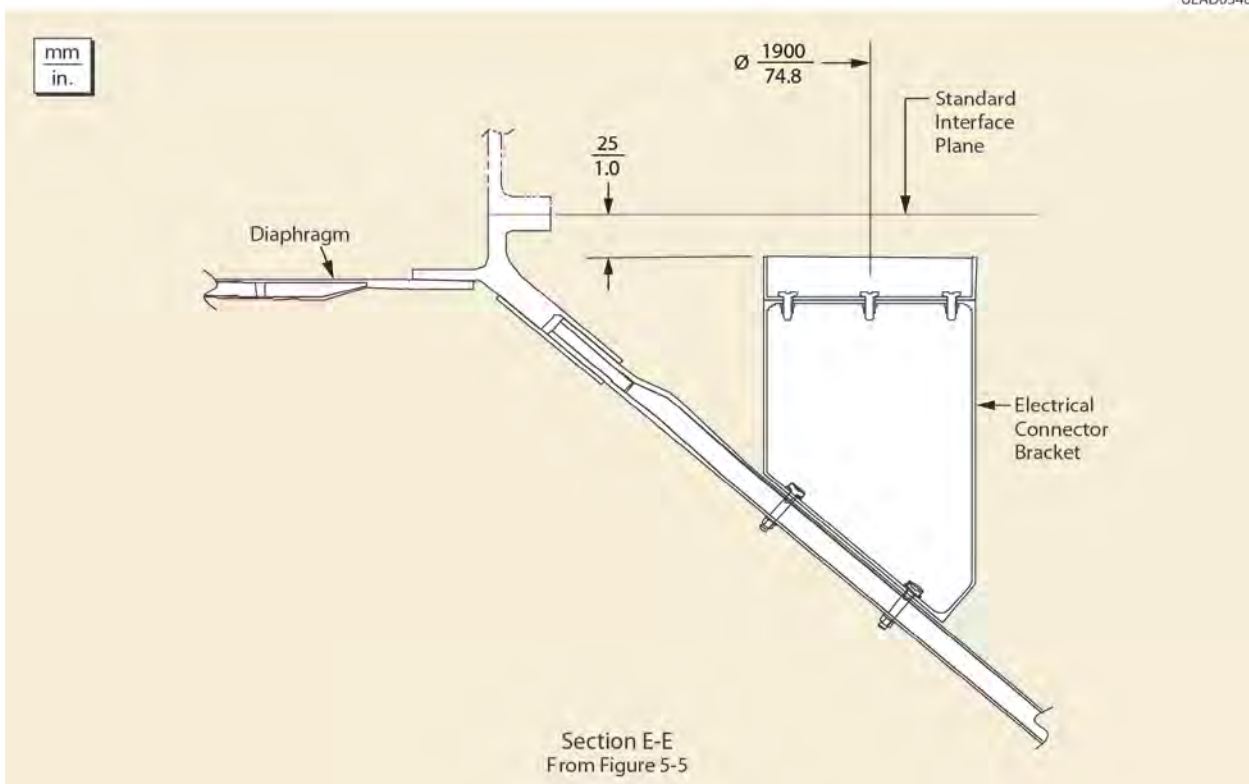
1575-4 PAF Electrical Connector Bracket (2 places)
